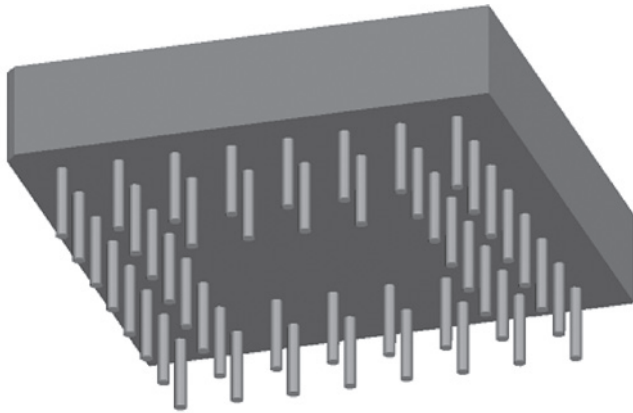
Bottom view of 48-pin, 8 × 8 pin grid array.
